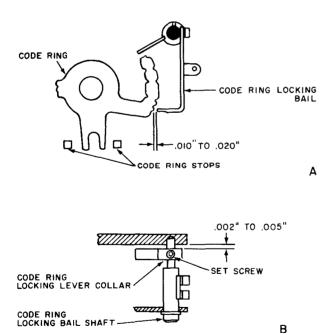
Code ring locking bail shaft and locking bail adjustments.
